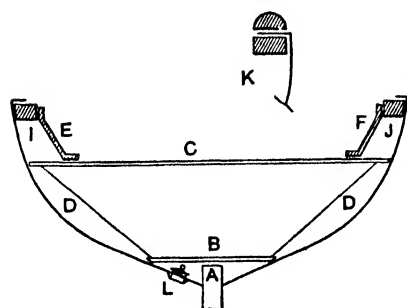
Section Showing Manner of Fastening the Hard Wood Rail in Place
